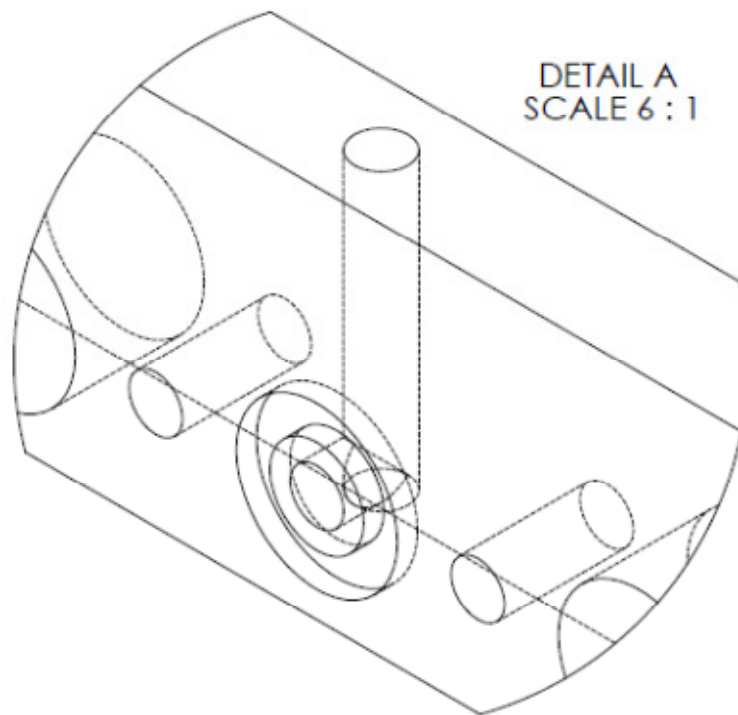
Top view of part 1 of the reference electrode fixture. Dimensions are in inches.
